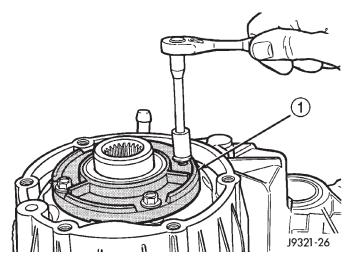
Install Front Bearing Retainer 1 – FRONT BEARING RETAINER
